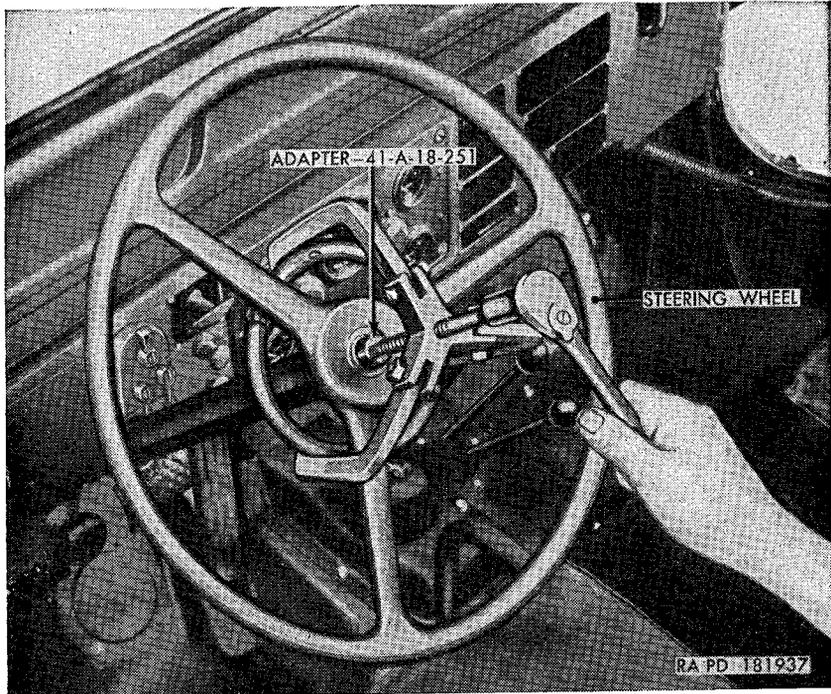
Removing steering wheel from steering gear shift, using puller and adapter—41-A-18-251.
